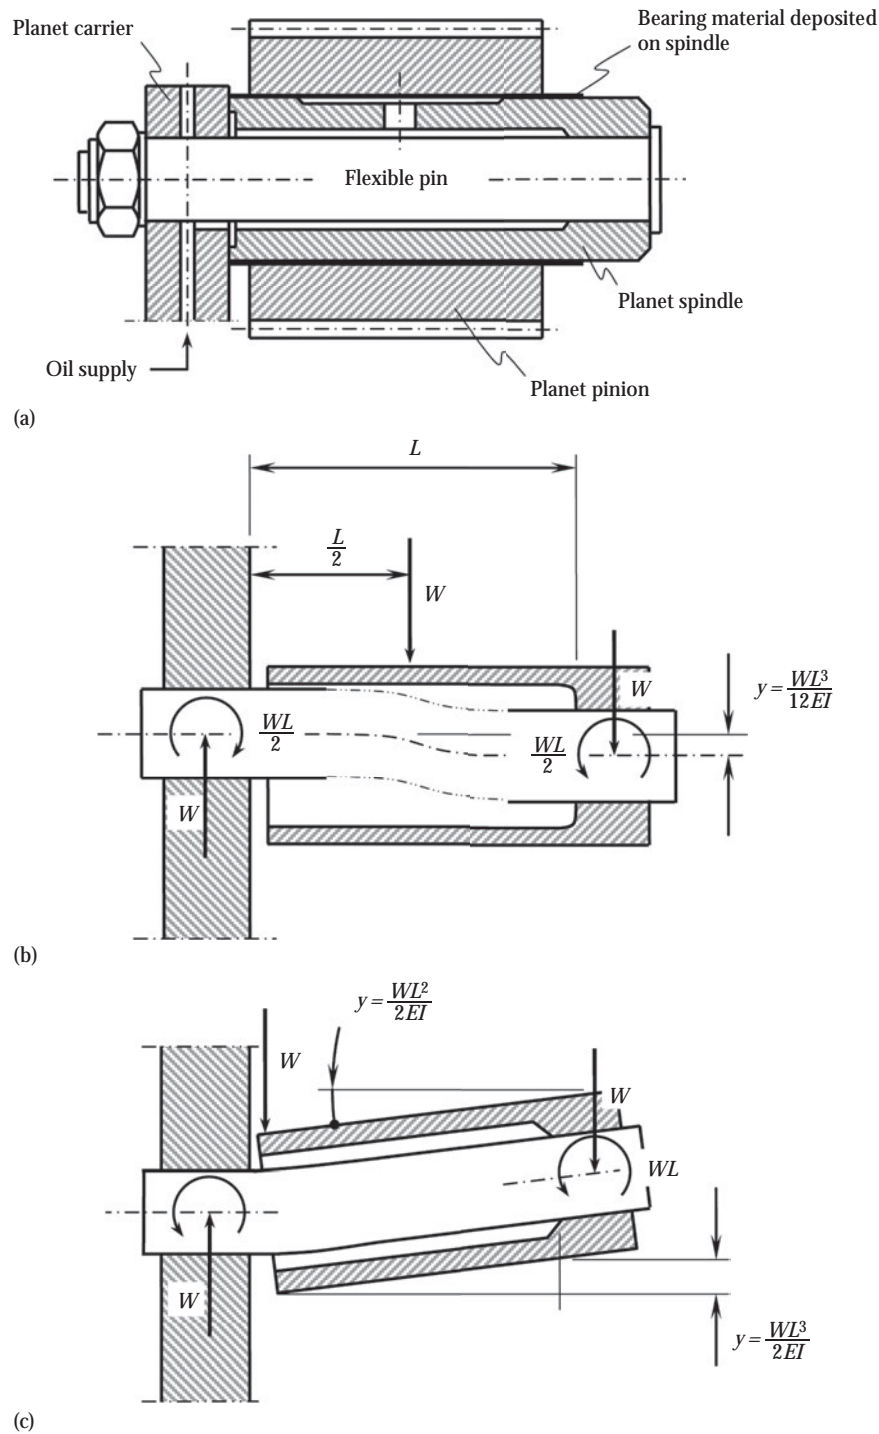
Compact orbital gear's flexible pin: (a) planet pinion rotates on a flexibly mounted spindle, (b) planet spindle is loaded at center, and (c) planet spindle loaded at end. W is applied load, L is the length of the flexible pin, and E is Young's modulus of elasticity. (After Hicks, R. J., *Proc. Inst. Mech. Engrs.*, 184, 85–94, 1969.)
